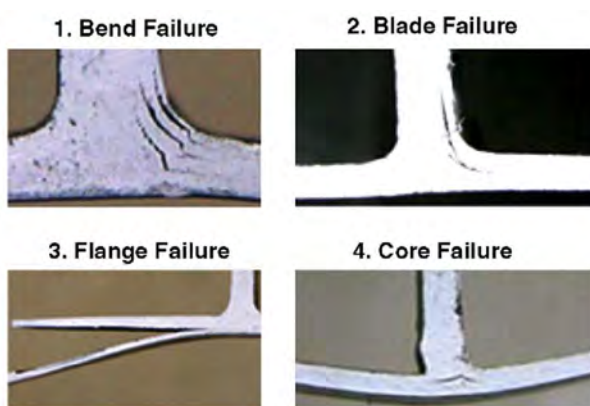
Failure modes for T-shape stiffened panels [88]: (1) delamination failure in the laminate at the skin-stiffener junction, (2) failure in the stiffener blade, (3) failure between skin and stringer and (4) failure at core.
